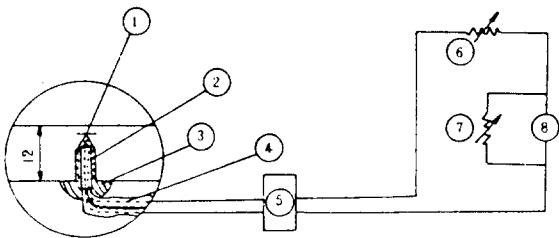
Workpiece and arrangement of thermocouples(PR 13%)for measuring thermal cycle
